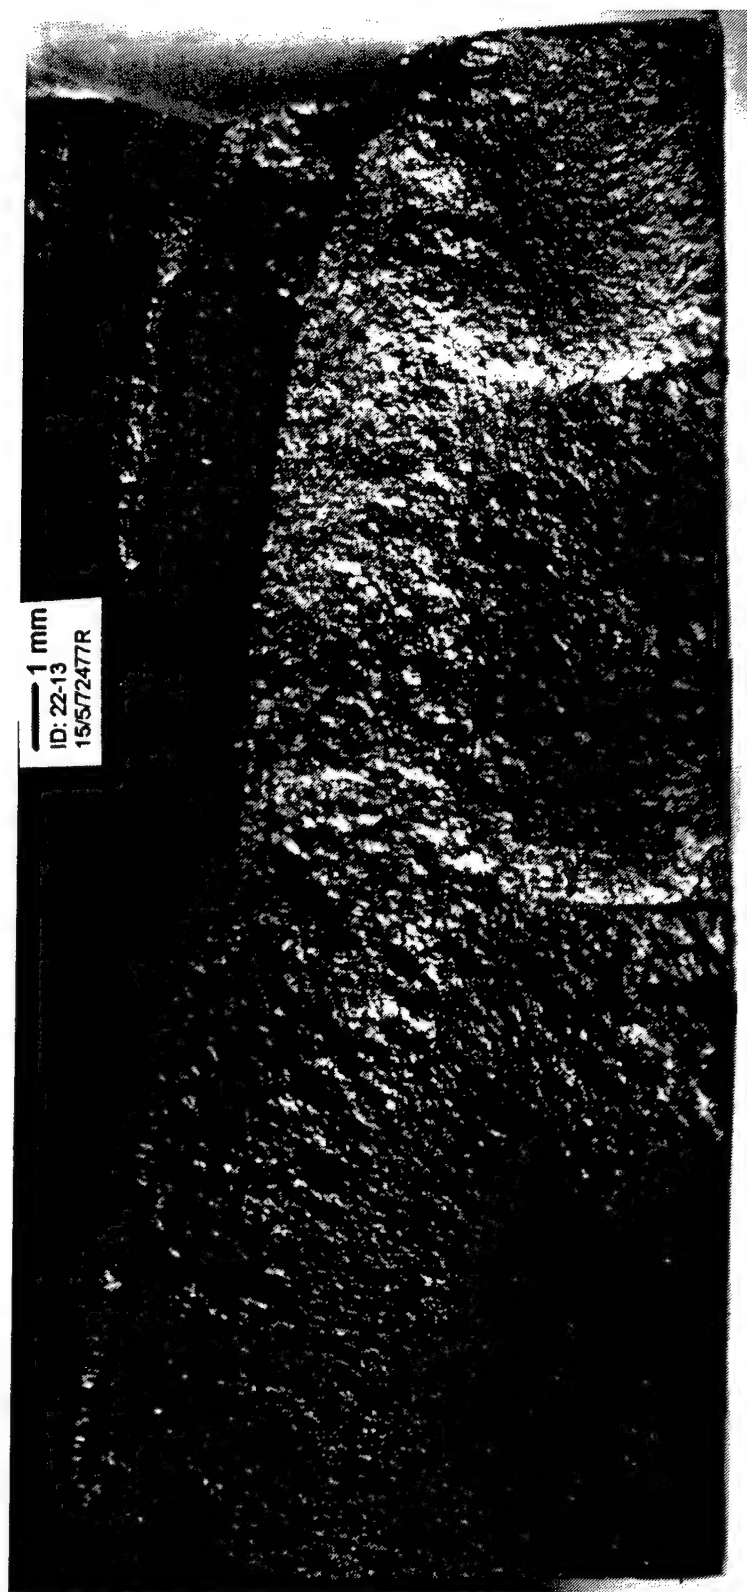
Fatigue fracture surface of the HSLA-80 butt weld sample subjected to random loading:
